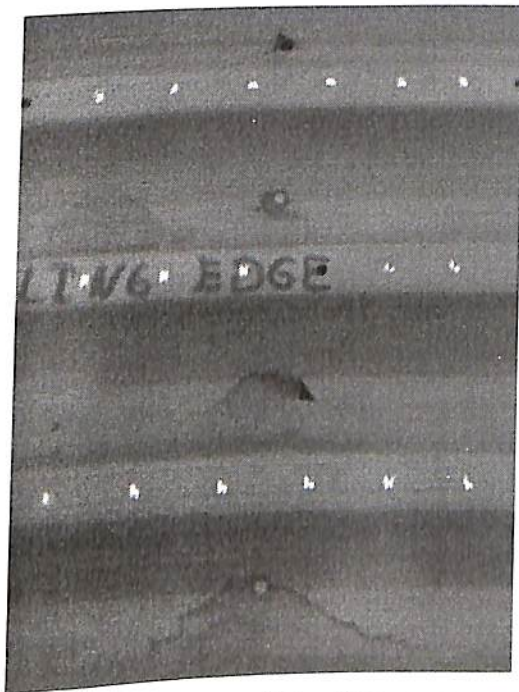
B – CORRUGATION CRACKS ON ONE OF THE WING SDR
